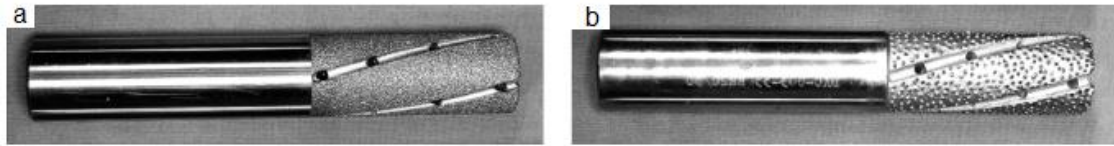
Example of abrasive cutters. a) A fine 80 grit cutter and b) coarse 30 grit cutter. [26]
